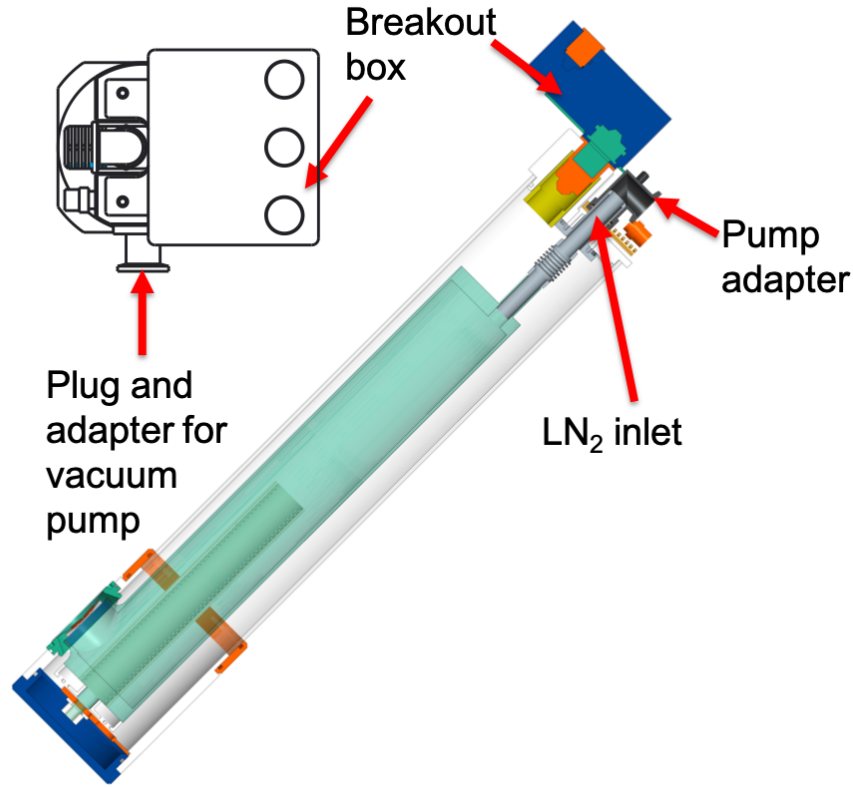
Schematic of the 7-channel system highlighting parts that are important for cooldown.
